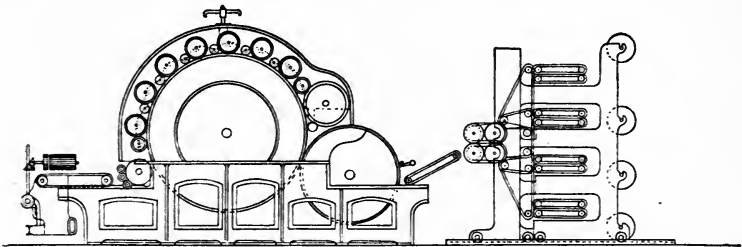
Finisher Card for Four Bobbins and Supplied with Cotton by the Scotch Feeder.
